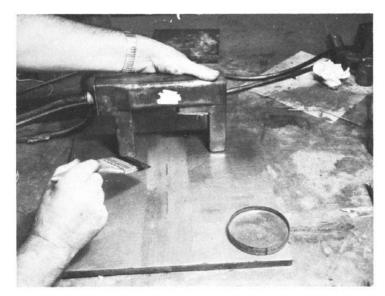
Magnetic Slurry Indications of Surface Cracks in Weldment (Produced by Yoke Magnetization, AC Continuous)
